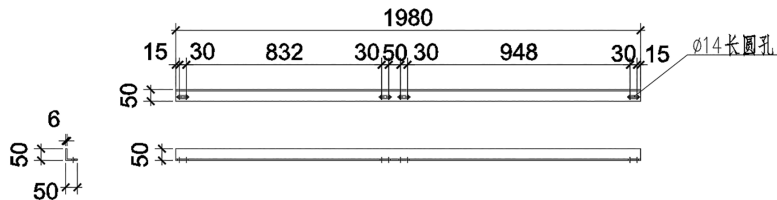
The dimension of angle steel bar (unit: mm)
